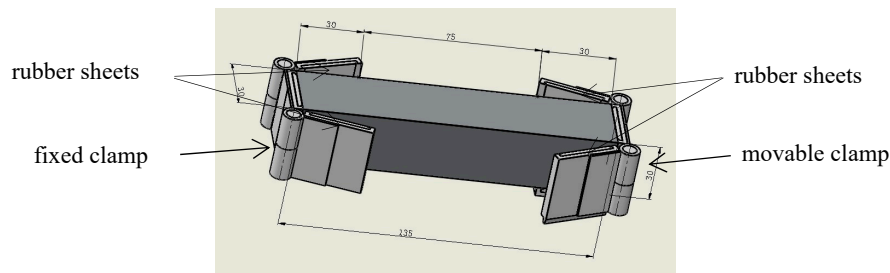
Schematic drawing of the uniaxial direct-tension test apparatus (units for the numbers: mm).
